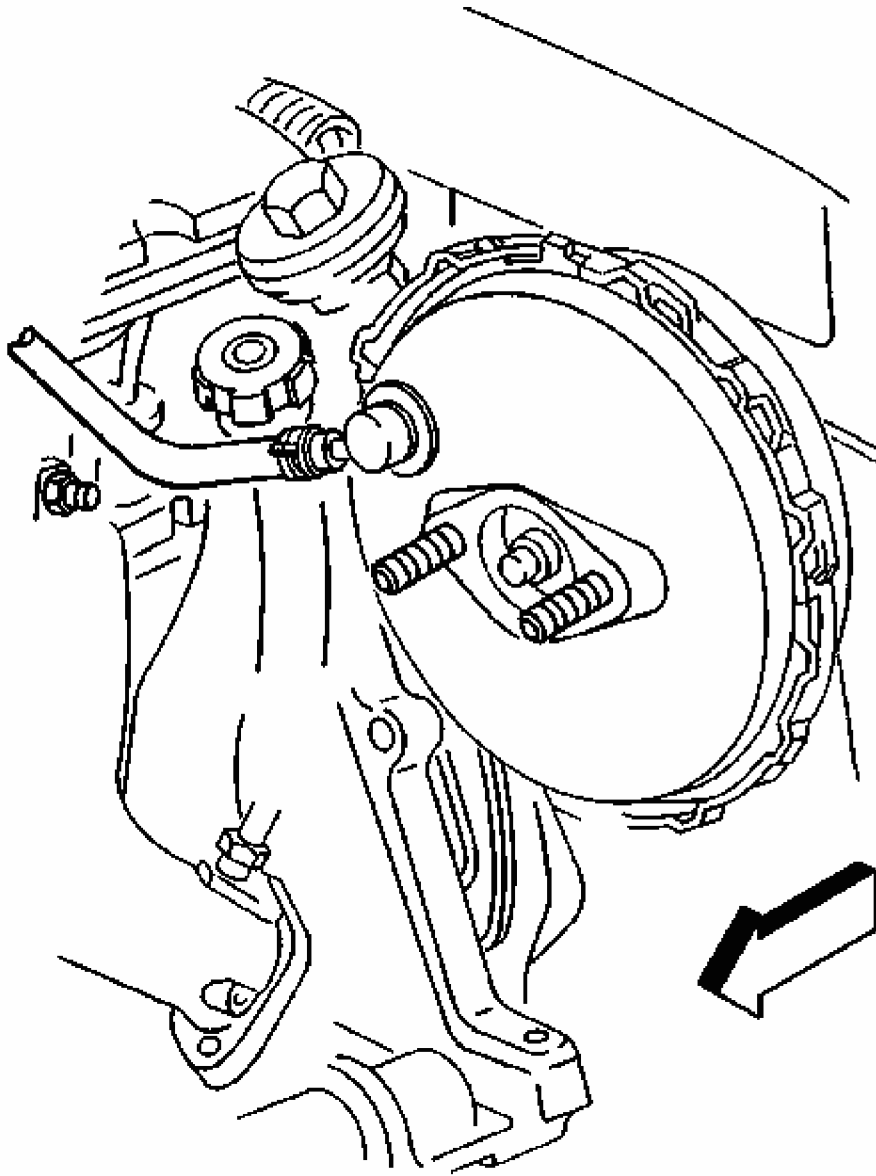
View Of Stoplamp Switch & Pushrod
